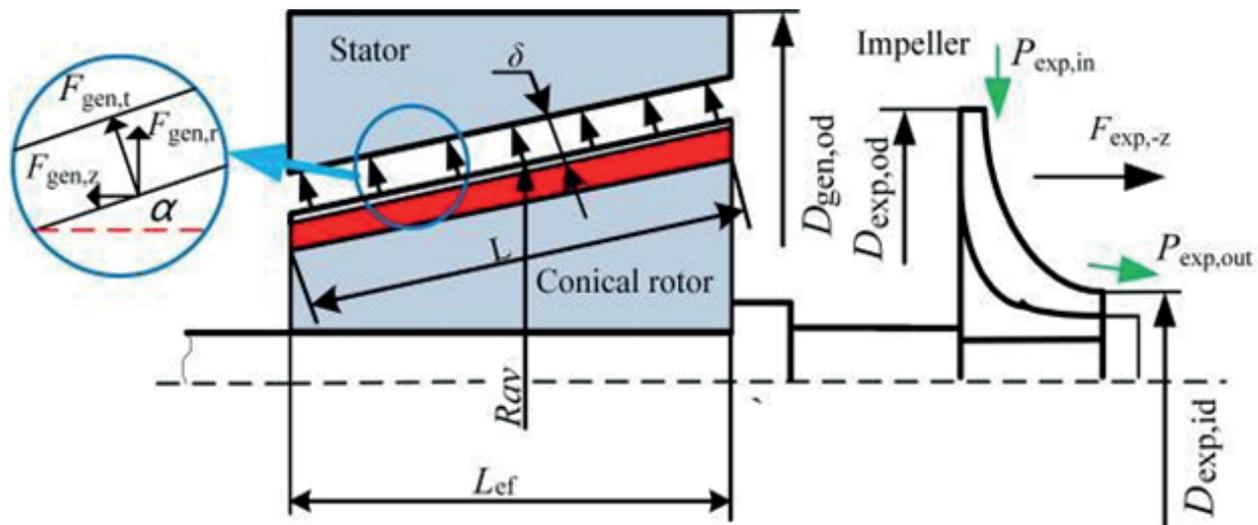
Geometric section of the generator with a cone rotor [\[14\]](#)
